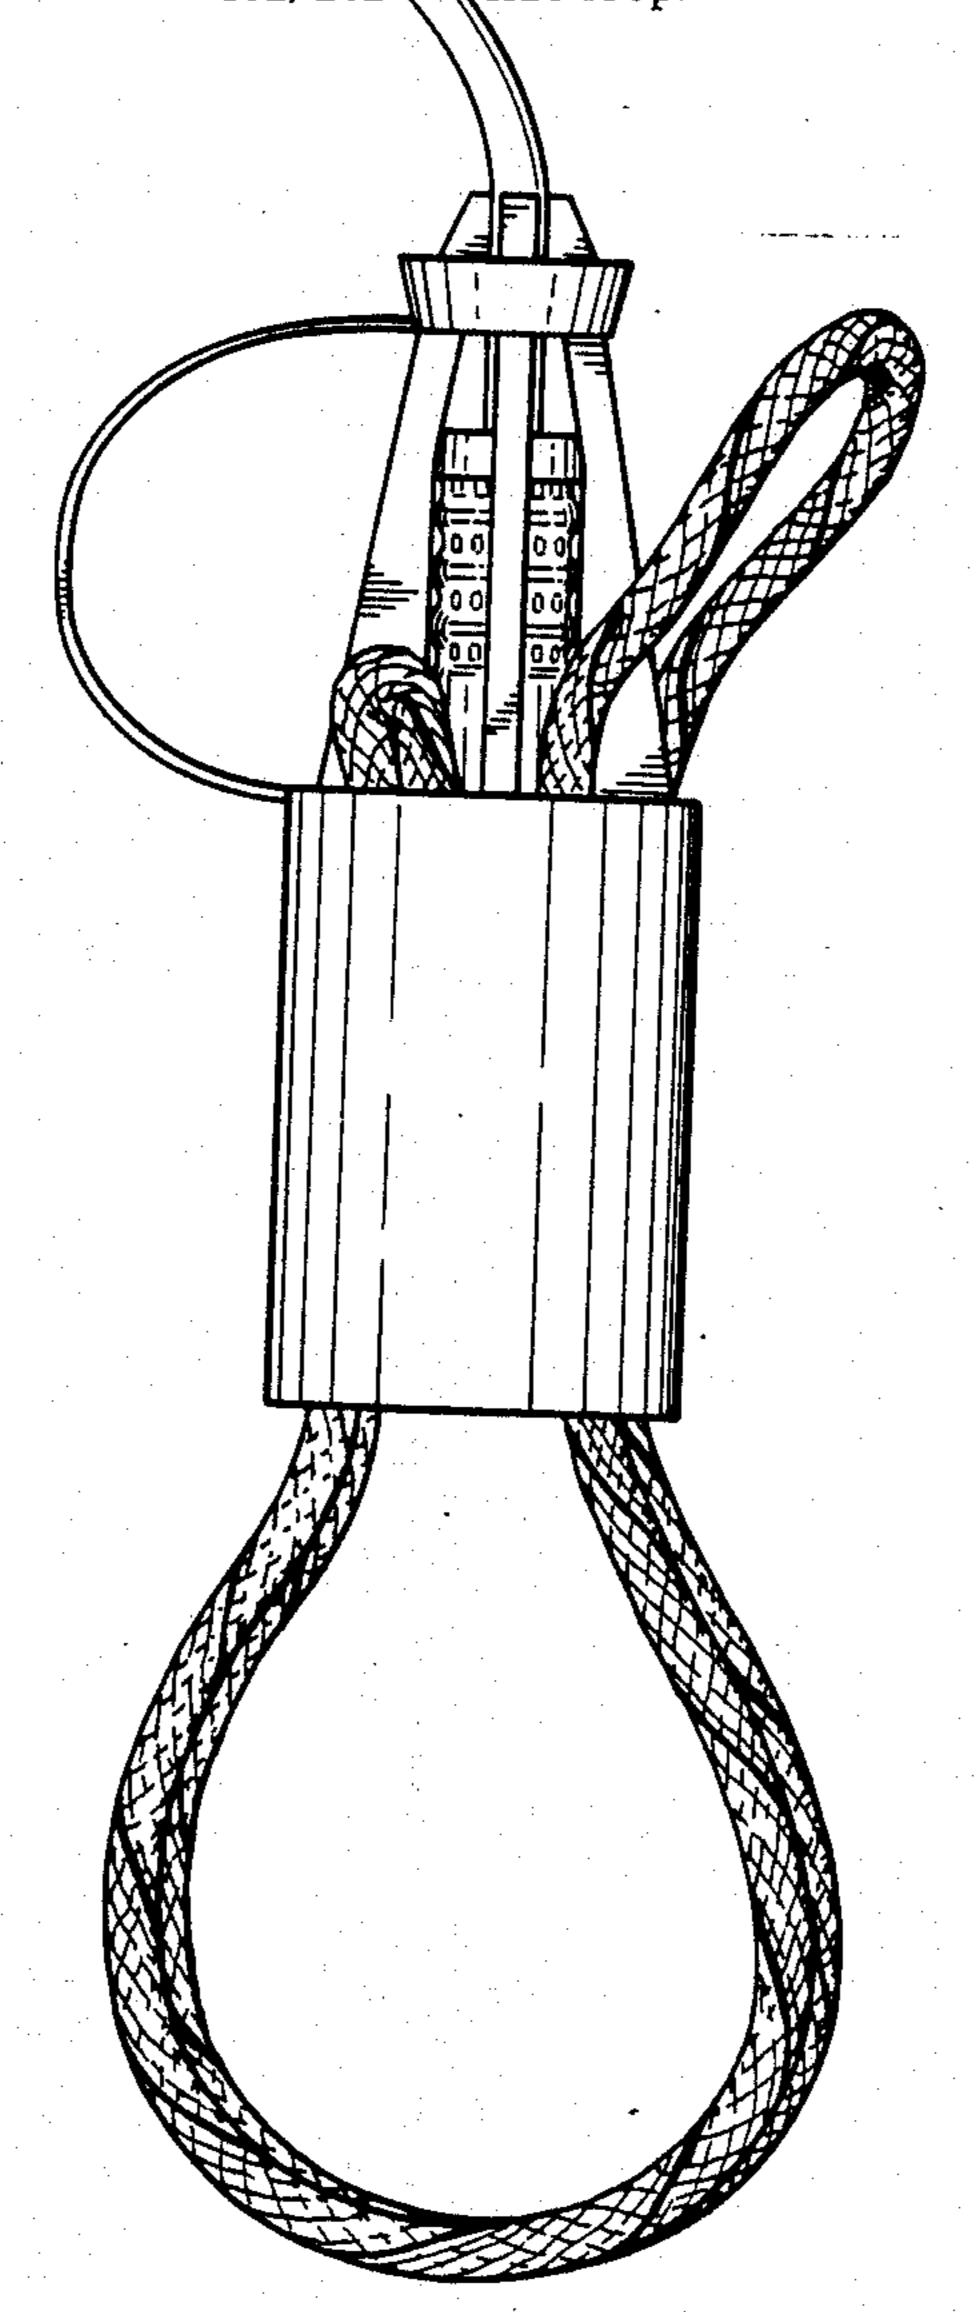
is a side elevational view of a combined signal transmission device and detonating cord for blasting assembly with the side loop omitted showing my new design;
